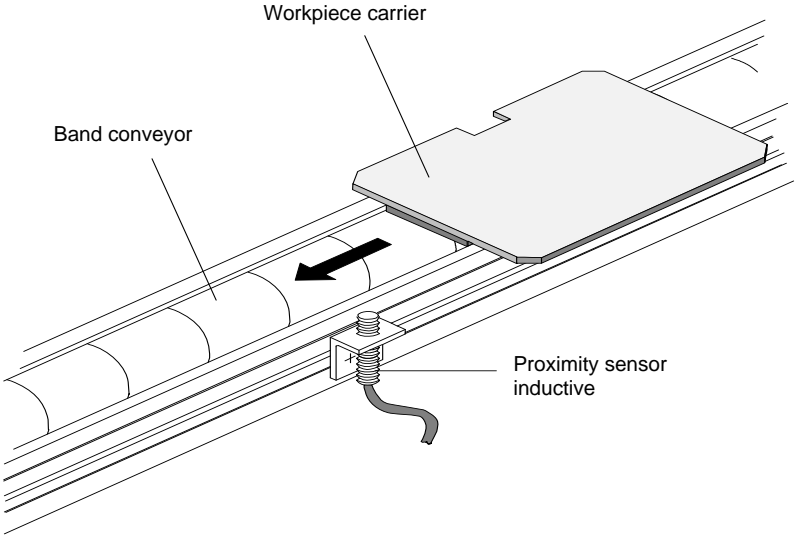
Detection of Metallic Workpiece Carriers on a Band Conveyor
